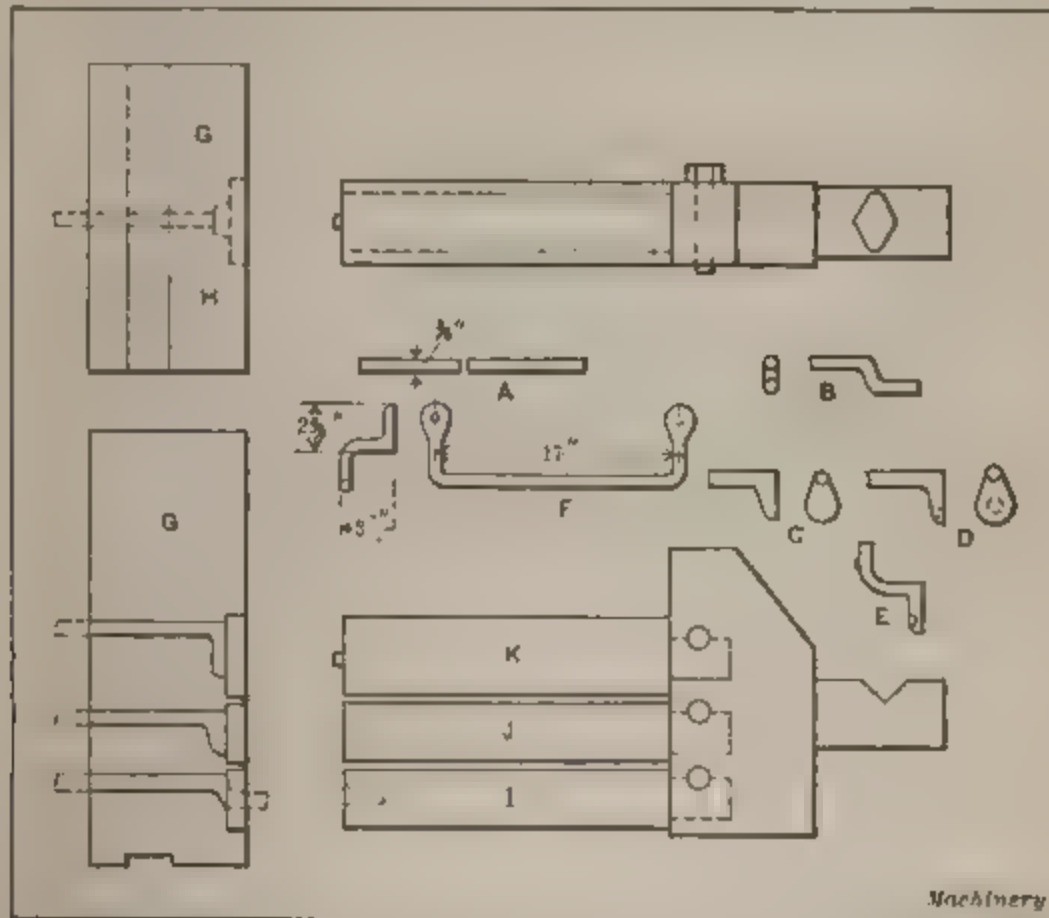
Dies and Tools used in forming the Feet of Ladder Treads
